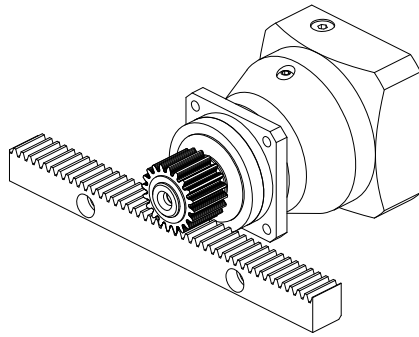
Recommendation for bearing assignment S (e.g. for straight-cut gearing)
